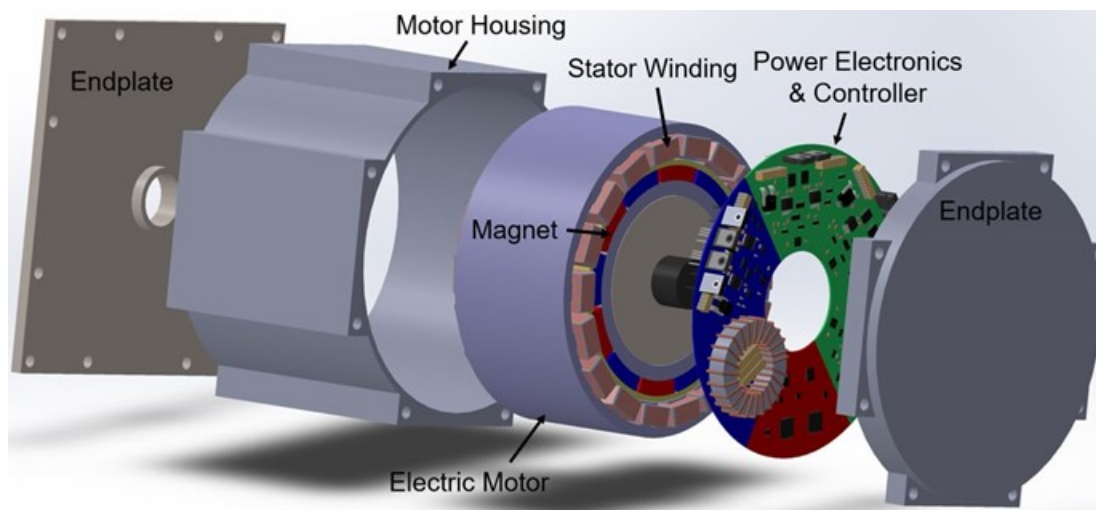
Example of an integrated motor drive configuration with inverter axially mounted in the machine housing.
